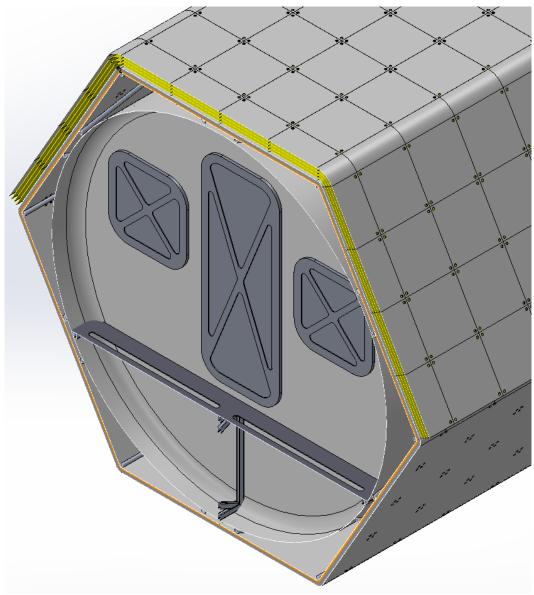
Suit Access Hatch Doors attached to the inside of the pressure wall
